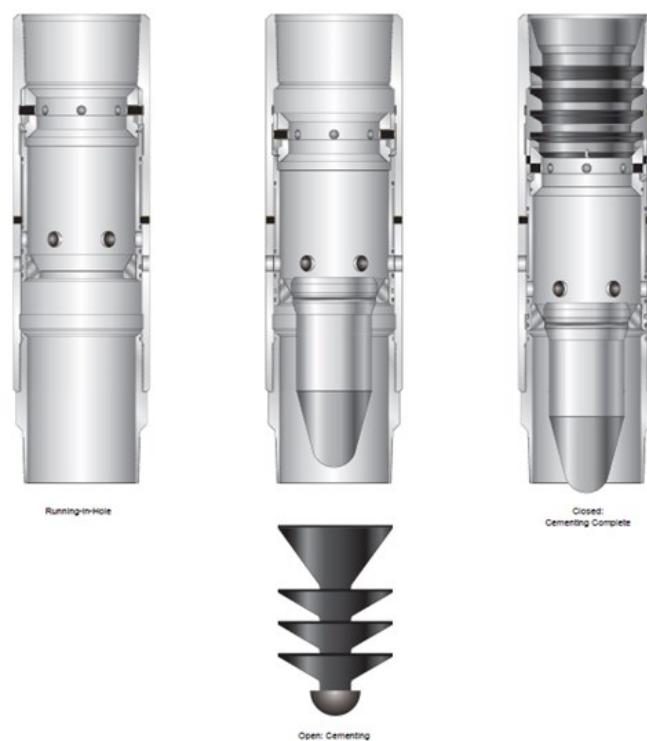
A cementing window is installed in the anchor- and production casing strings for backup in case of failure of the primary cementing method.
